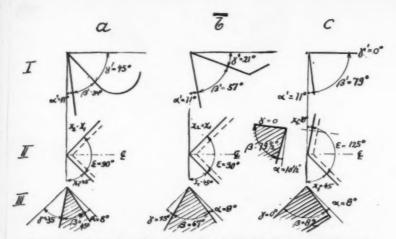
Comparison with cutting edges of High Speed Steel (a); Cemented Carbides (b) and Diamond (d) for the cutting of aluminum. Front adjusting angle Kappa=45° side clearance angle alpha=86°; front clearance angle about 11 deg. for all tools. I, side view; II, top view showing point angle; III, actual cutting edge. Observe that in the case of the third tool, all angles are atrengthened. Good cutting condition is obtained thru extreme polish of the surface.
